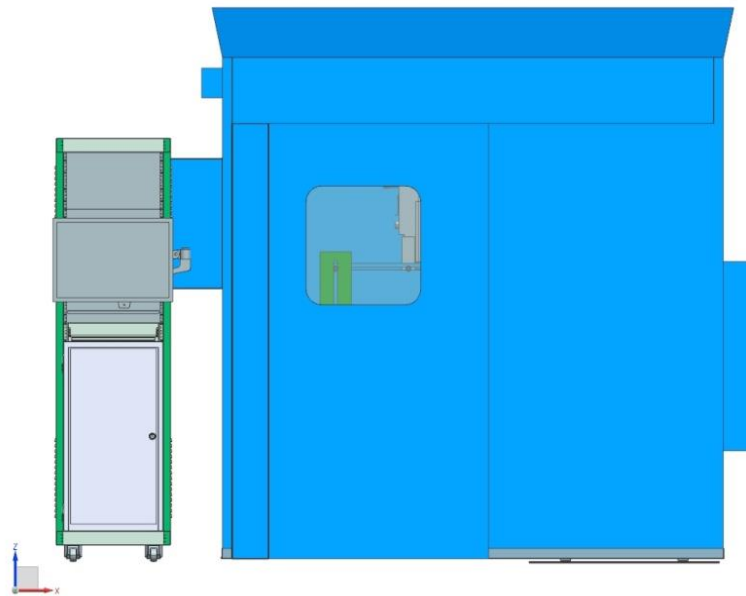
Prototype SIR Inspection System Enclosure and Rack
